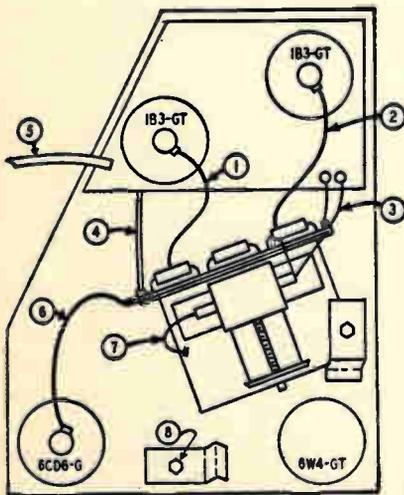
Physical layout of parts and critical wiring in the high-voltage cage.
